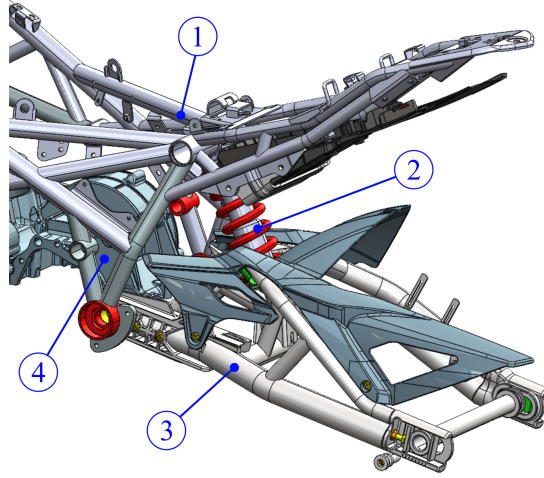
View of the rear suspension of the retained motorcycle. Chassis (1), conventional coil-over shock absorber (2), swing arm (3), engine assembly (4).
